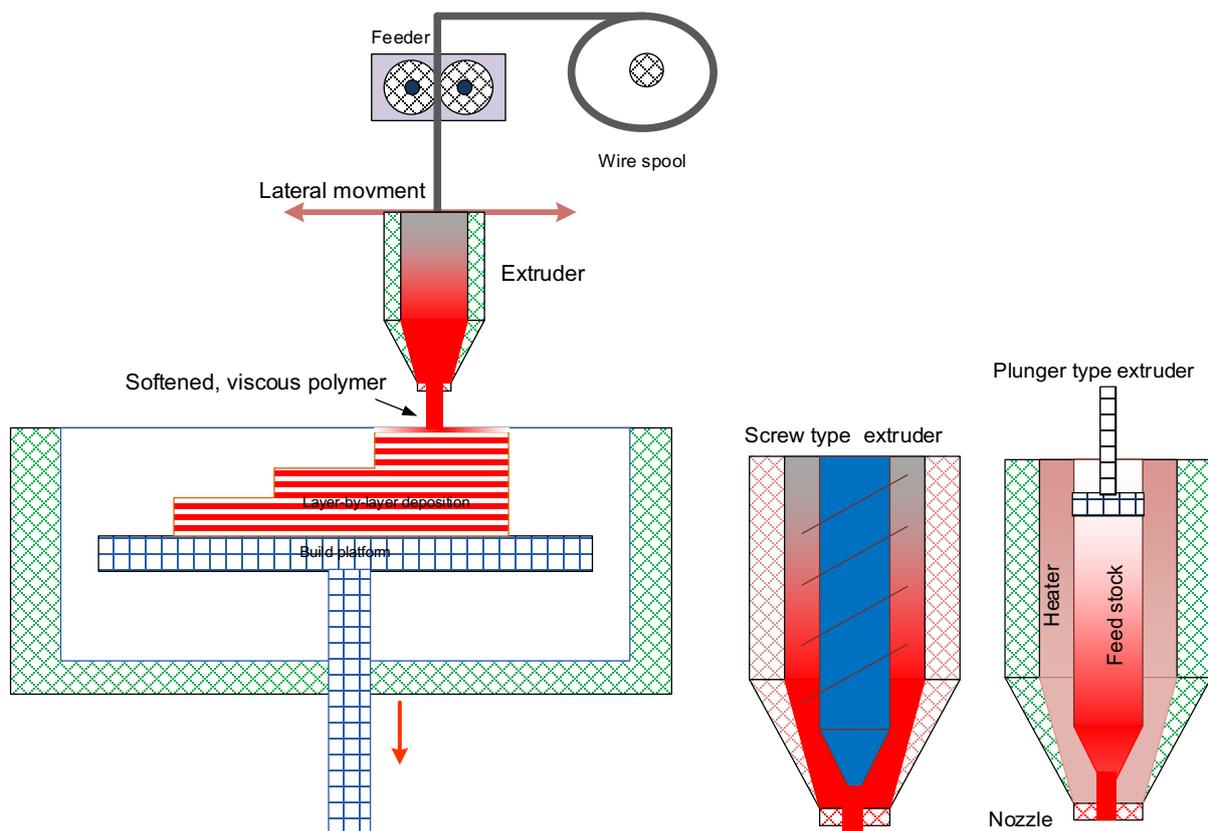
Schematic showing the approach of making product by extrusion additive manufacturing
